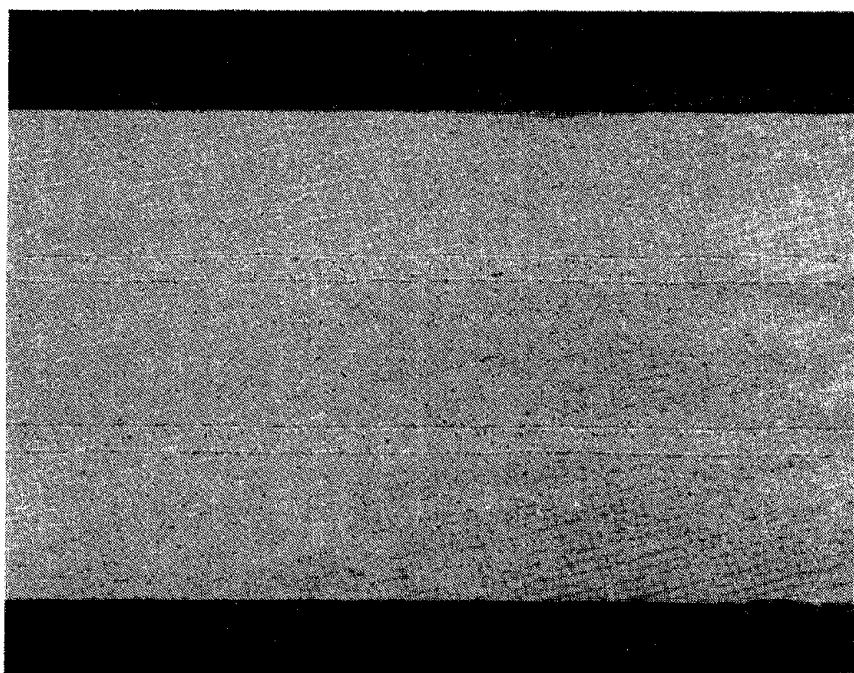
One-Inch Wide Adhesive Bonded Strip
